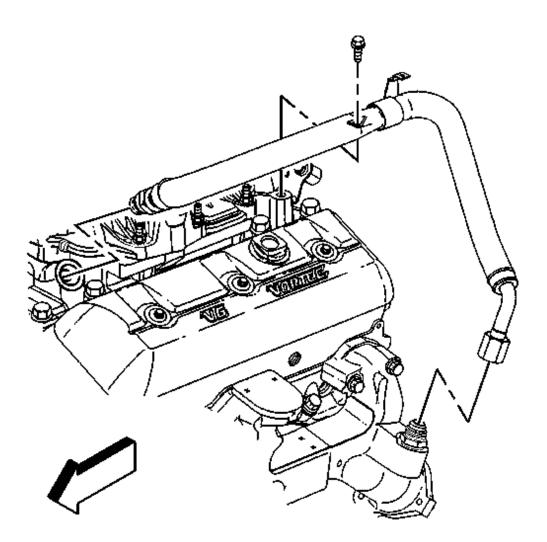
View Of EGR Valve Inlet Pip & Bracket Bolt Courtesy of GENERAL MOTORS CORP.
